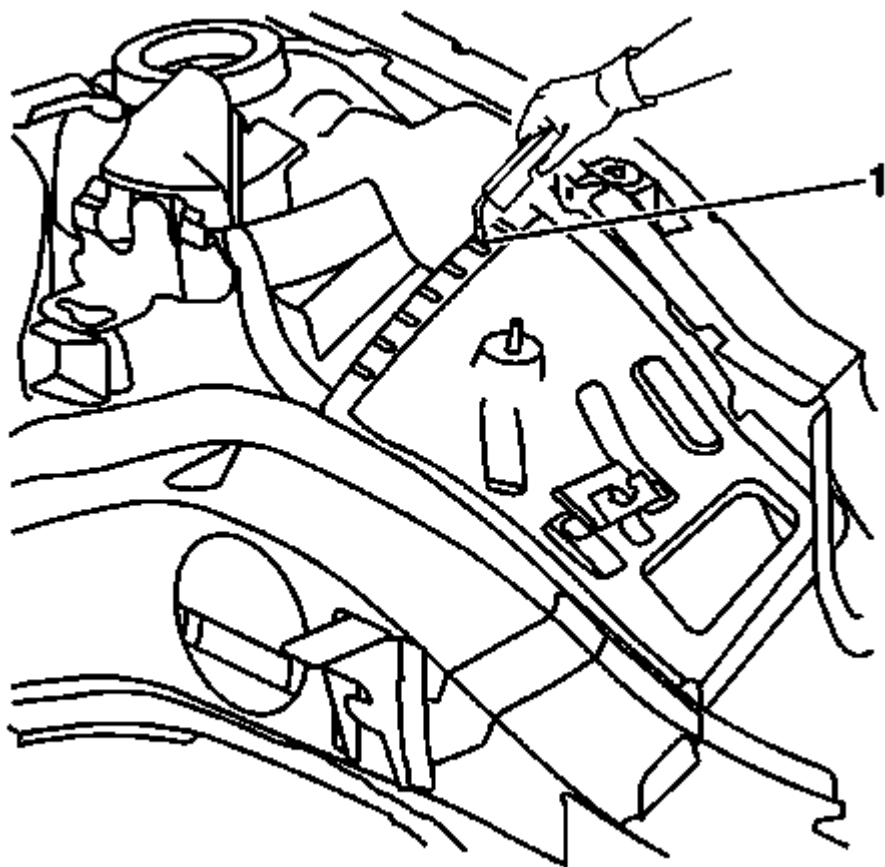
Welding Front Wheelhouse Front Panel
